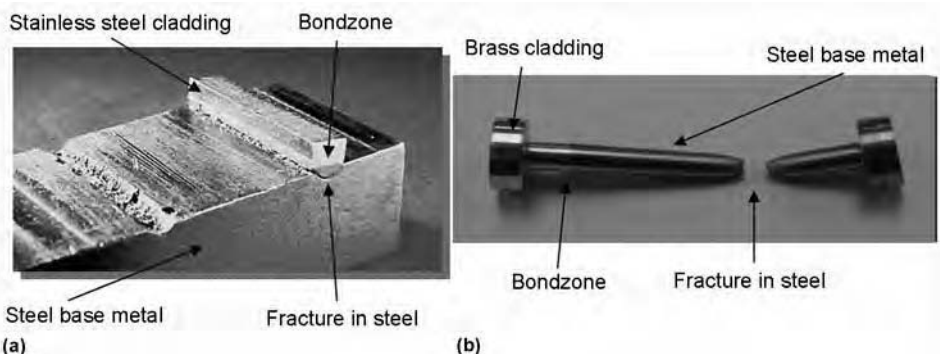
Test specimens of explosion welding interface showing ductile failure in the parent steel. (a) Shear strength test. (b) Tensile strength test
